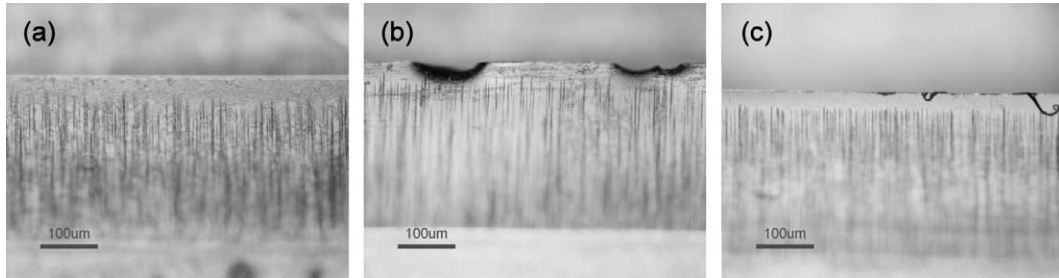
Damage to a steel razor blade caused by cutting PMMA fibre. (a) A pristine blade. (b) Damage from cutting room temperature fibre with a hot blade. (c) Damage from cutting hot fibre with a hot fibre.
